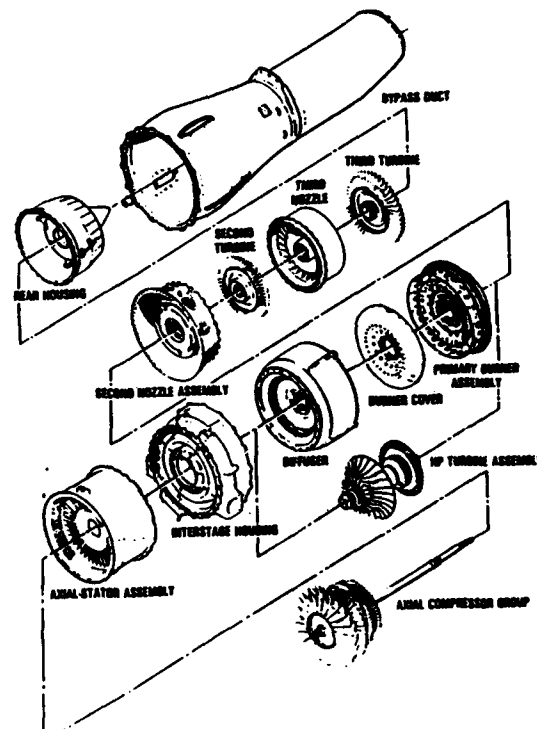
Isometric exploded drawing of the F107 CME engine assembly.
